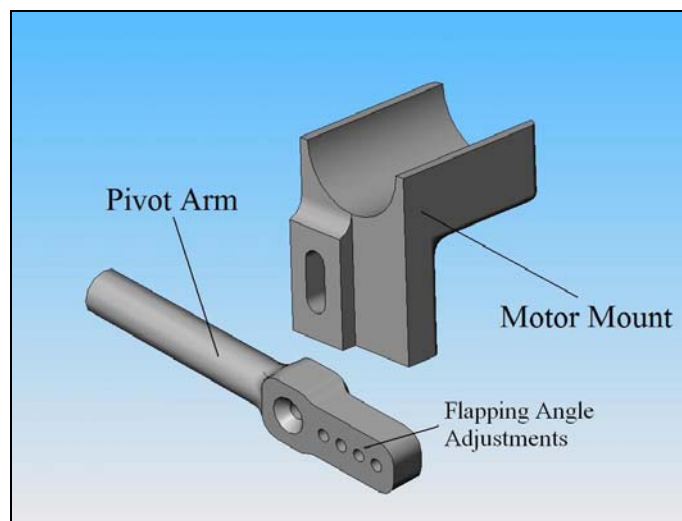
Flapping Mechanism Pivot Arms and Motor Mount
